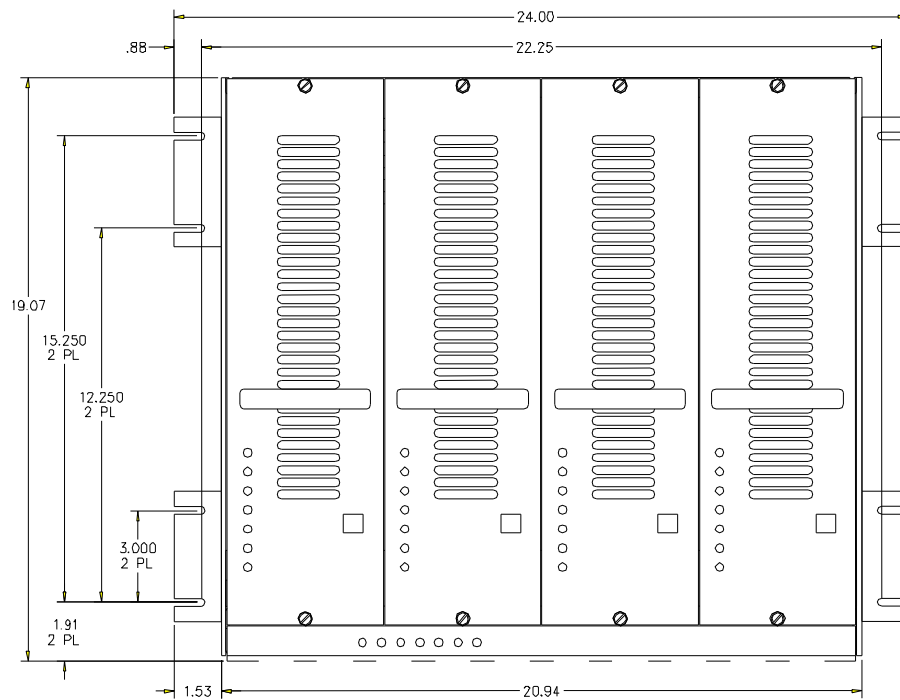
Model HPC8689-400 Side View Combiner Shelf Assembly
